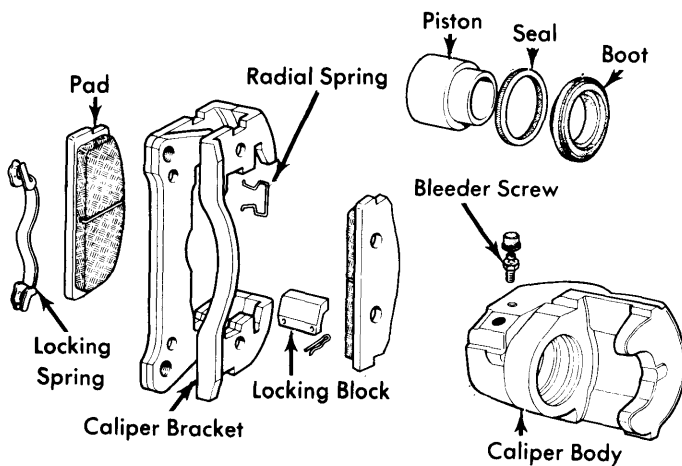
Front Brake Caliper Assembly Exploded View (124 and 131 Models)
